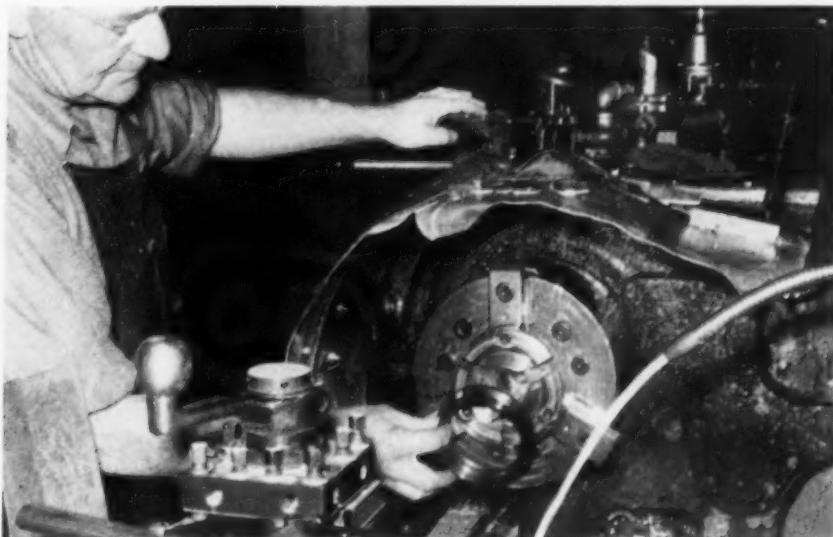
Air chucks installed on all turret lathes at Tyce Engineering Company have increased productivity. With one hand of the operator
